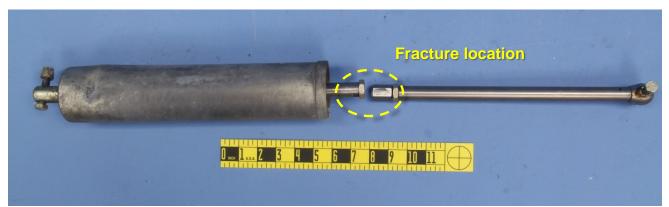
Fractured dampener assembly, as received. The piston had fractured at the circled location.
